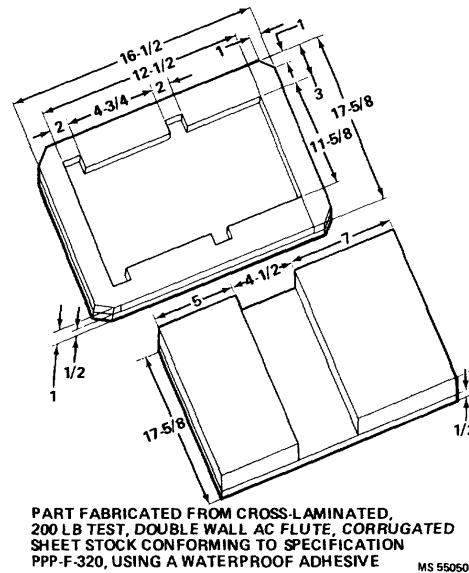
Mount Drive Control Box Blocking Top and Bottom
